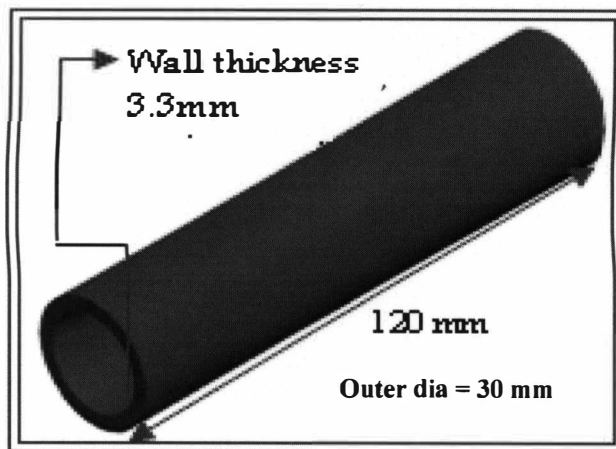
CAD drawing showing the specifications of the SiC tube
